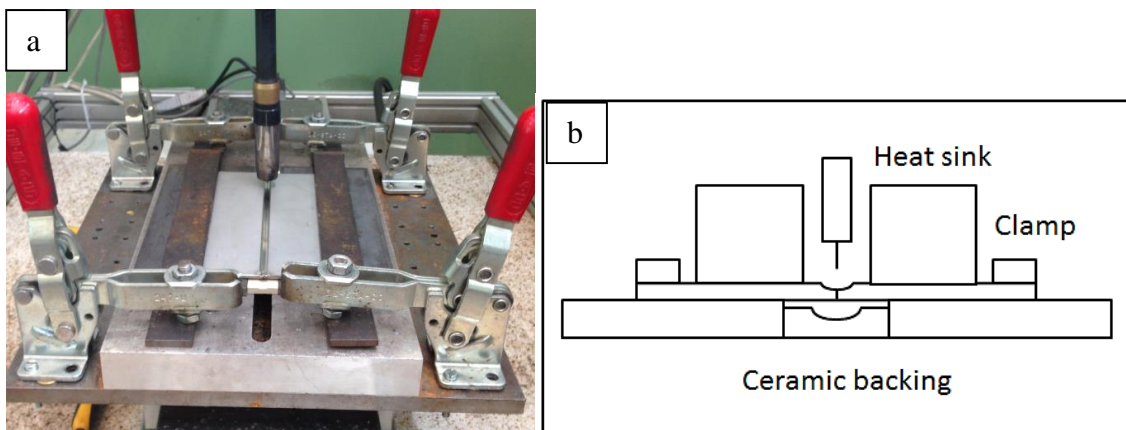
The configuration of butt welding. (a) Physical presentation; (b) schematic presentation.
